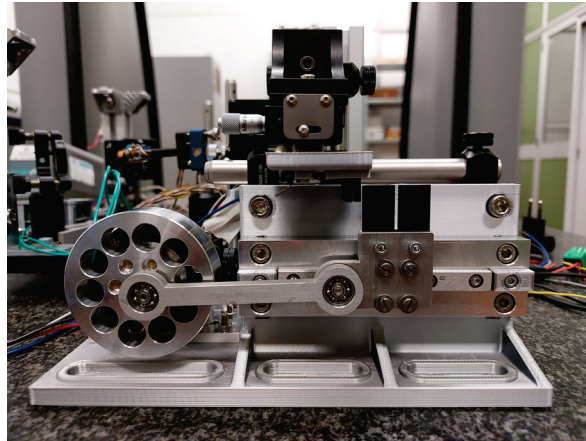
Picture showing the new aluminum machined parts, held in place by an oversized 3D printed plastic support.
